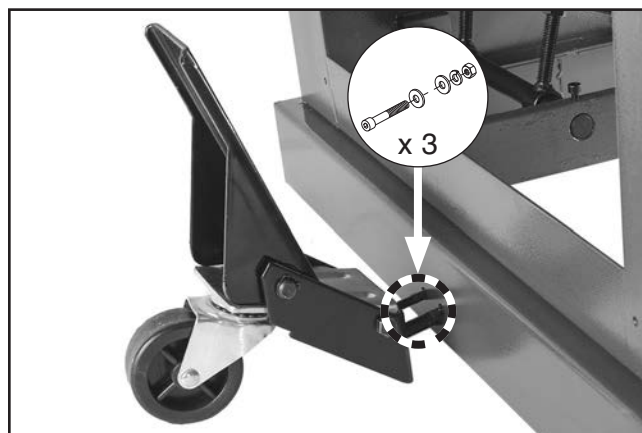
Attaching foot-pedal caster assembly to bottom of machine.
